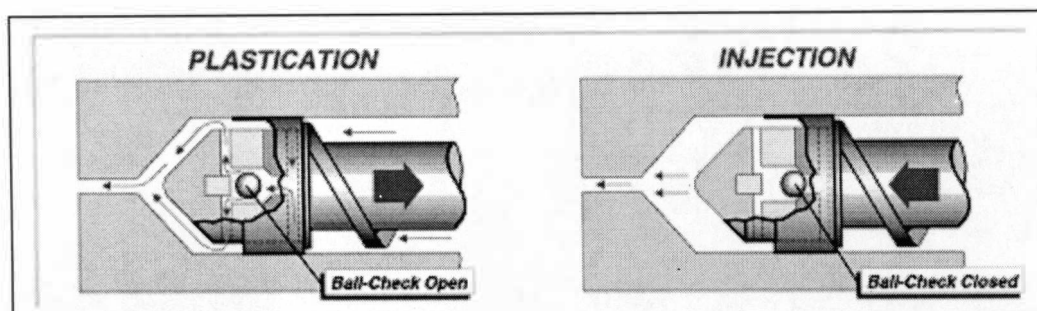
Typical Ball-Check Valve in Open and Closed Position
